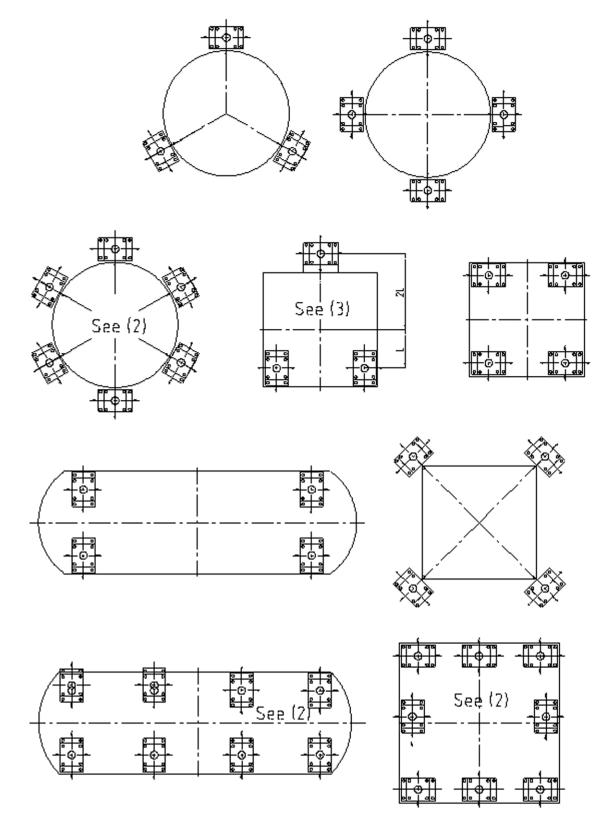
Plan View of Mounting Arrangements without Stabilizers
